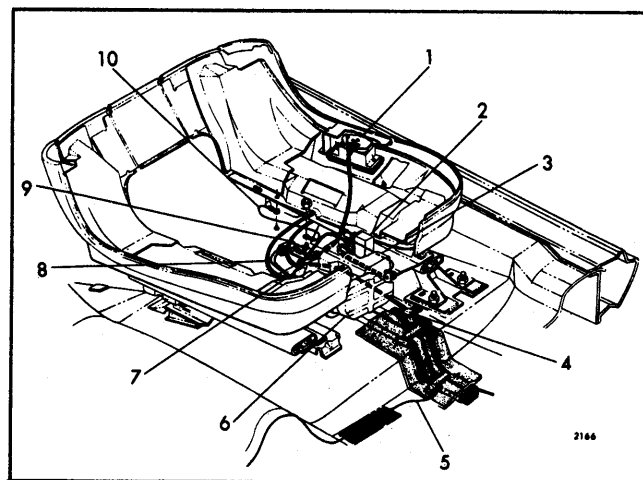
Four-Way "Strato" Bucket Seat Wiring - All Styles
